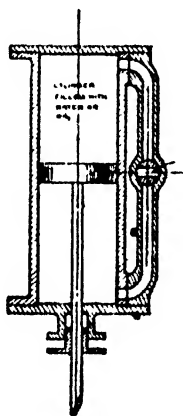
Section of the hydraulic brake used to "hold" the reversing gear. When the valve is turned off (as shown) the piston cannot move.
